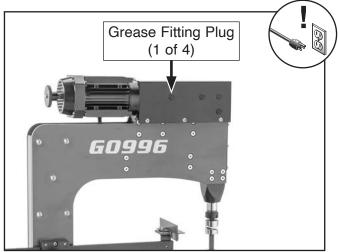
Location of crank shaft grease fittings (hidden behind plugs).
